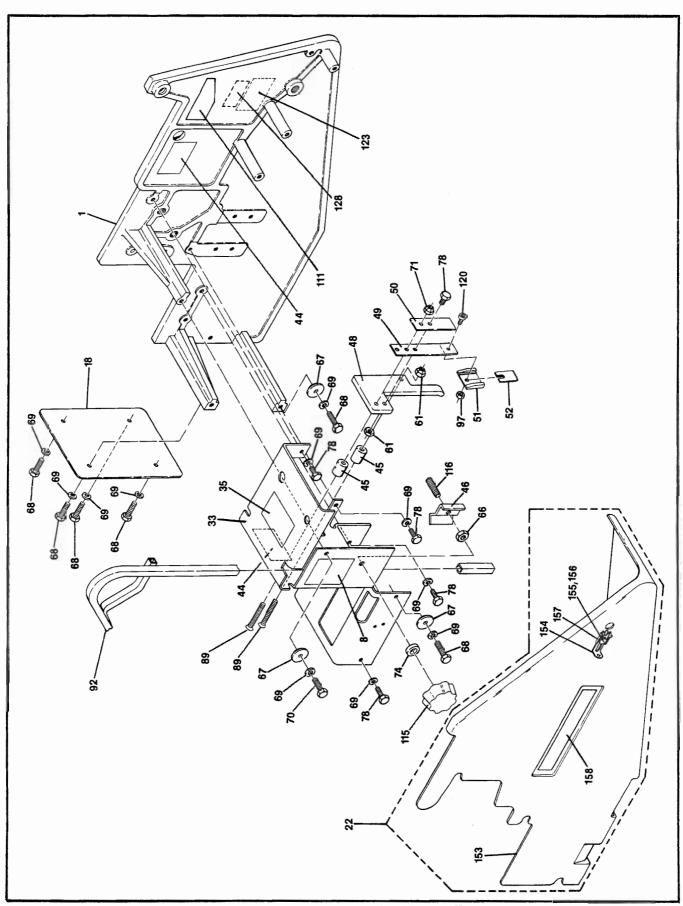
MAIN FRAME - NEST - COVERS & CUT-OFF ASSEMBLY
